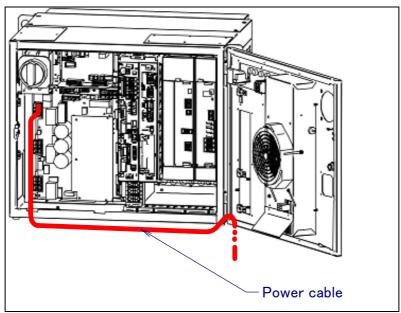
(g) Connection of ROBOWELD iC/H (Power Wave i400) (7/7)
